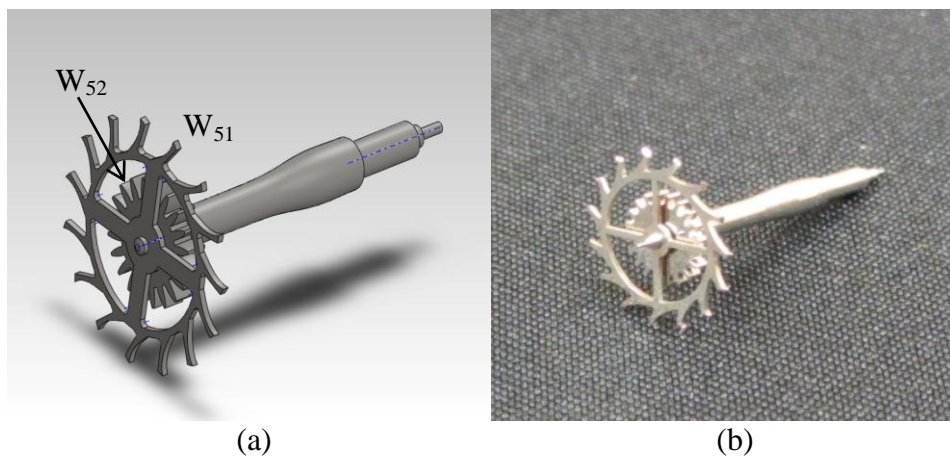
Escape wheel, W_{51} , and wheel, W_{52} , of the gear train with (a) Solidworks view, and (b) photograph of escape wheel assembly
